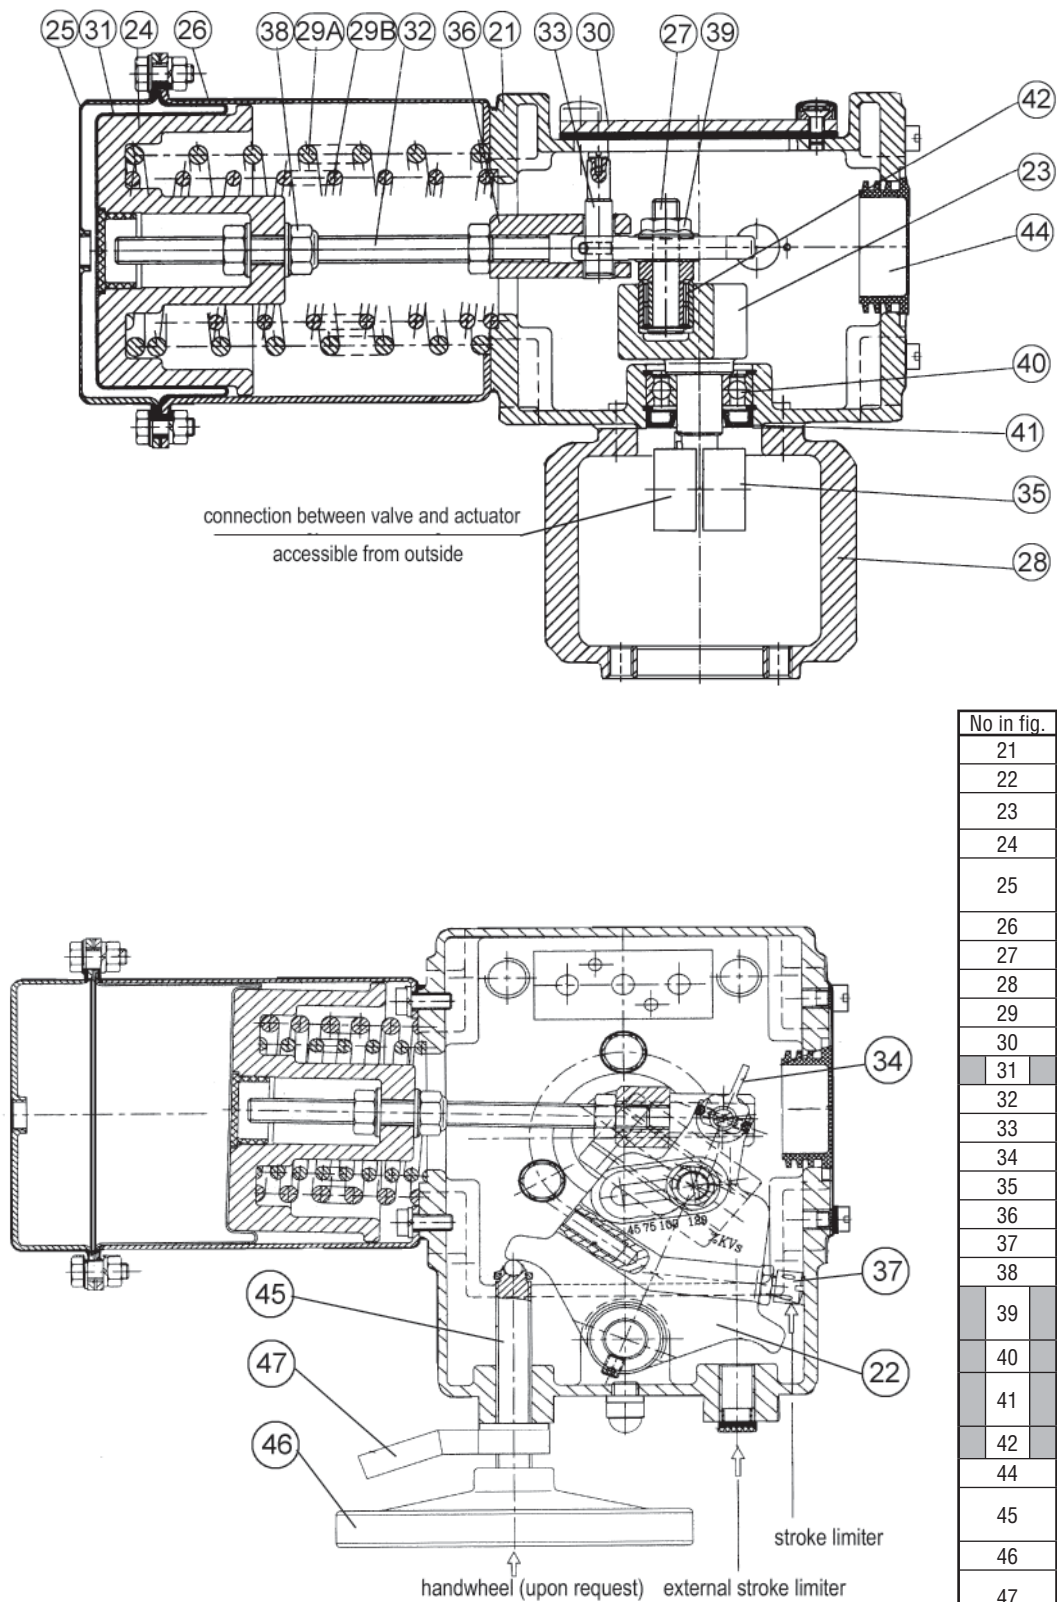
Rotary pneumatic actuator (spring and diaphragm) type 99
